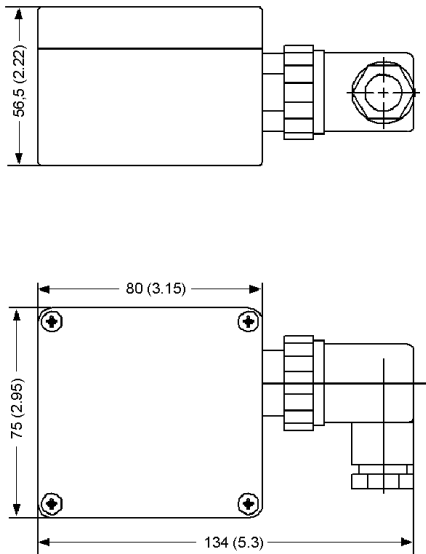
Inductive contact K33i, dimension in mm (inch)
